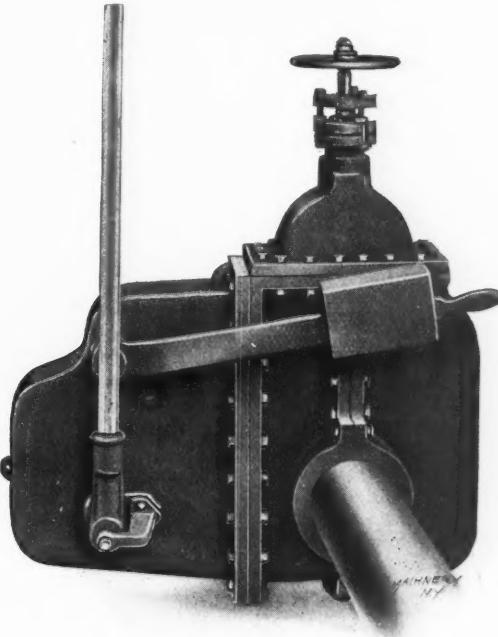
Sawing Arrangement Clamped in Place, ready to begin Cut.
